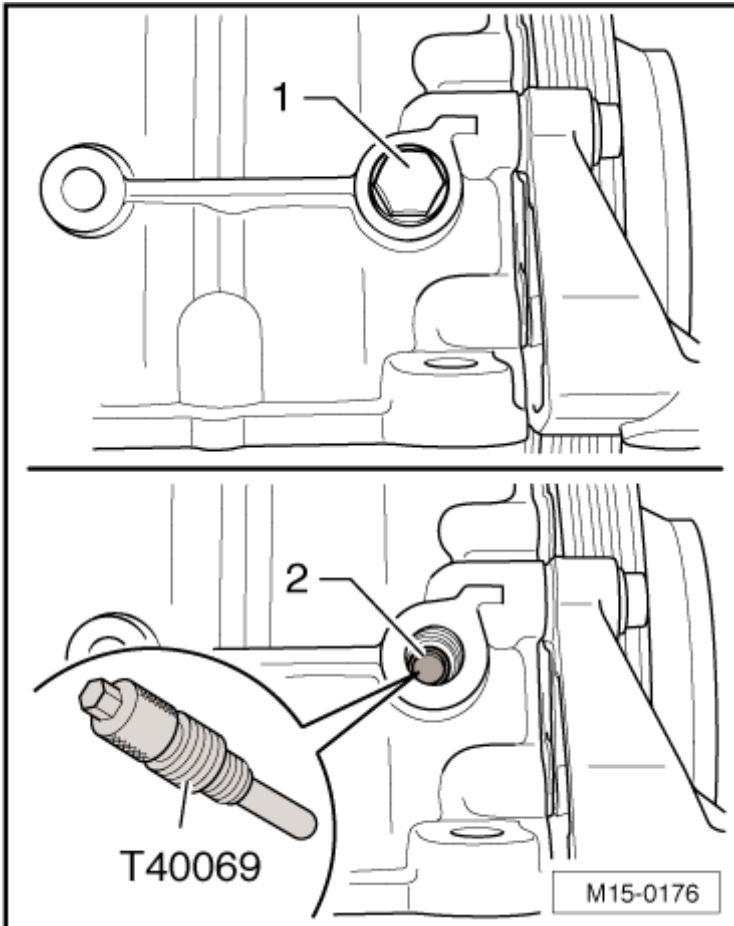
Identifying Crankshaft Must Not Be Rotated Out Over TDC Marking
